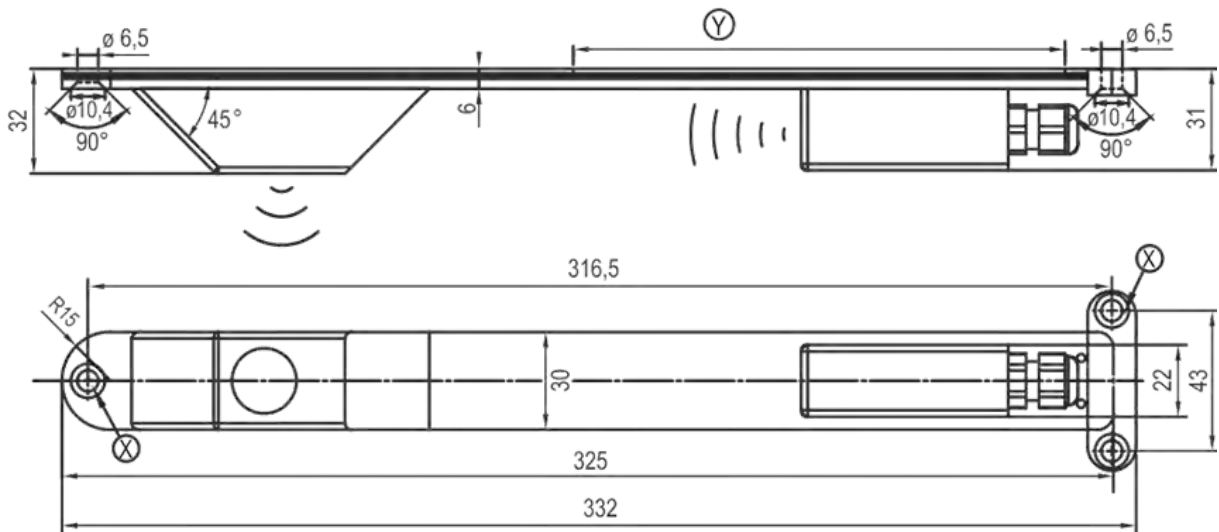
Dimensioned drawing Sensor CSM-V100R
